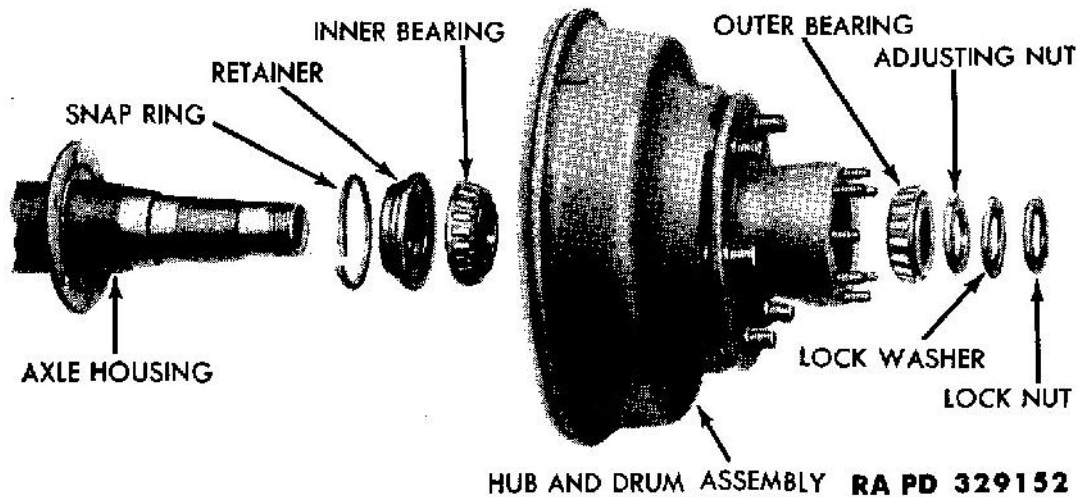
Rear Wheel Bearings and Hub — Disassembled
